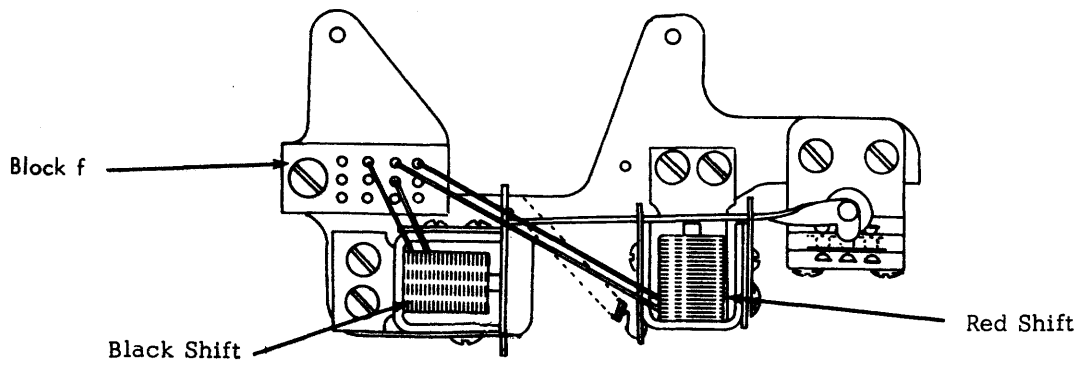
2 Magnet Red Ribbon Shift Assembly
